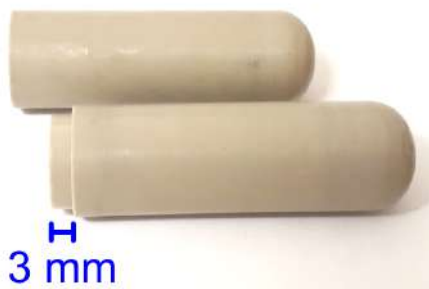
Future improvement: Reducing the length of the adaptor by 3 mm allowing for easier removal of the MLA-150 tool.
